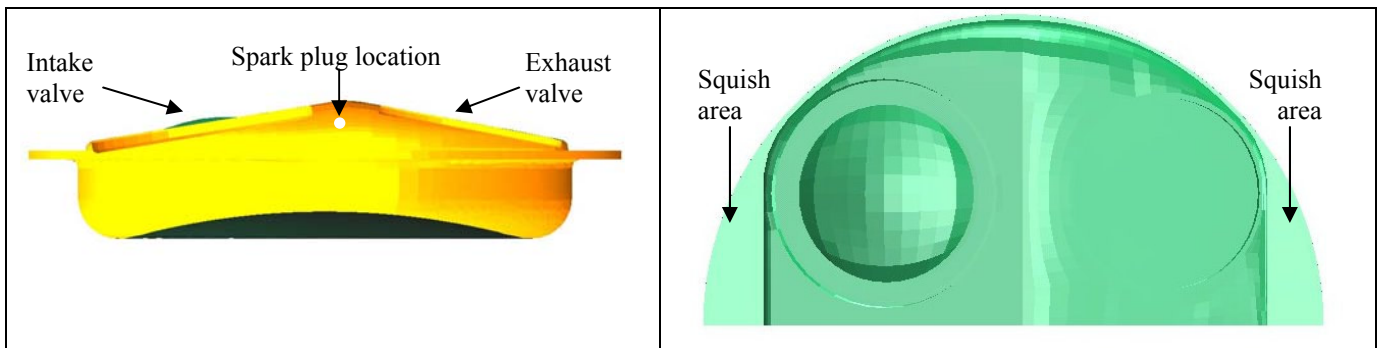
Drawing of the combustion chamber (left: cross section; right: top view)
